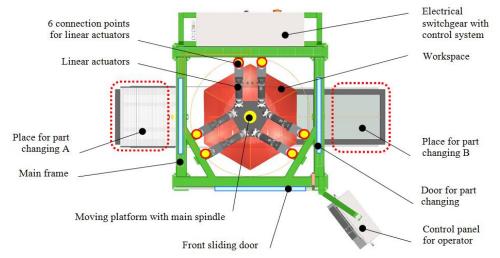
The structure of a machine tool based on parallel kinematic structure called hexapod.
